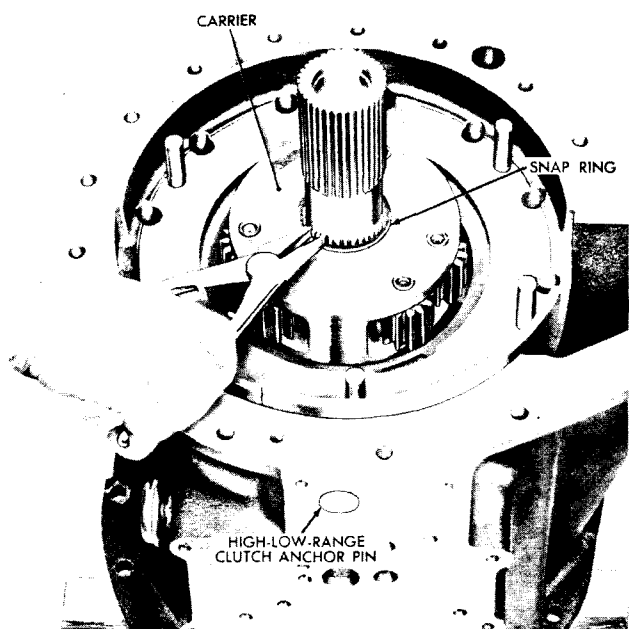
Installing snap ring which retains low-range carrier assembly
